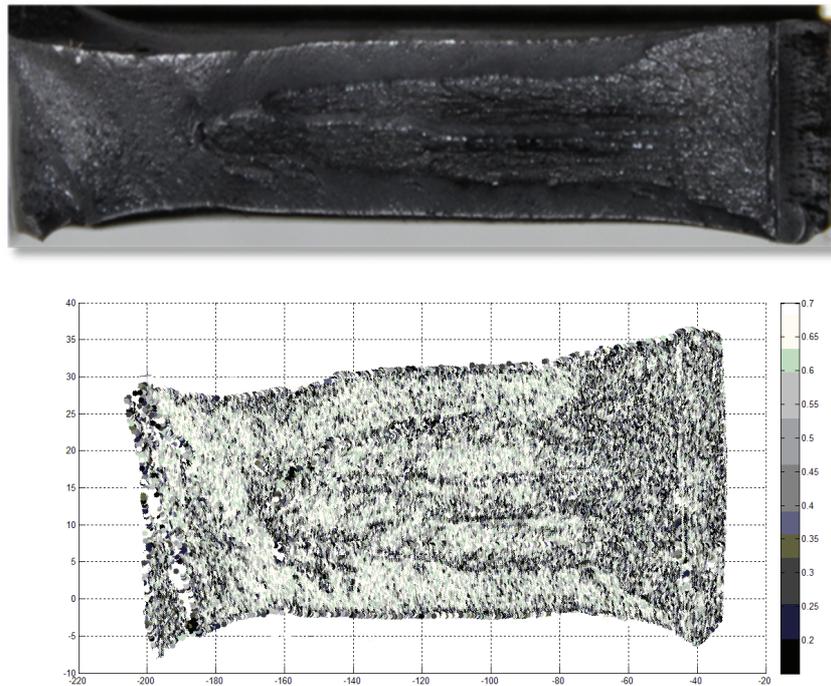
Fracture surface of broken DWTT specimen - API 5L X-70 steel at -20°C and accounting probability field $p_d(\varphi)$ of ductile fracture
